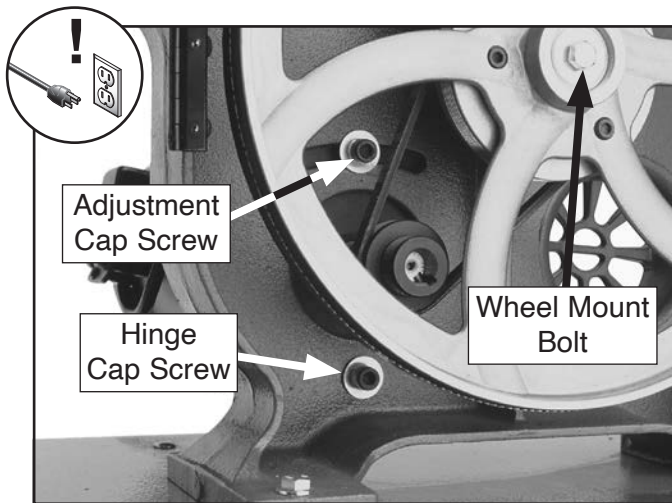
Locations of the wheel mount bolt, and motor adjustment and hinge cap screws.
